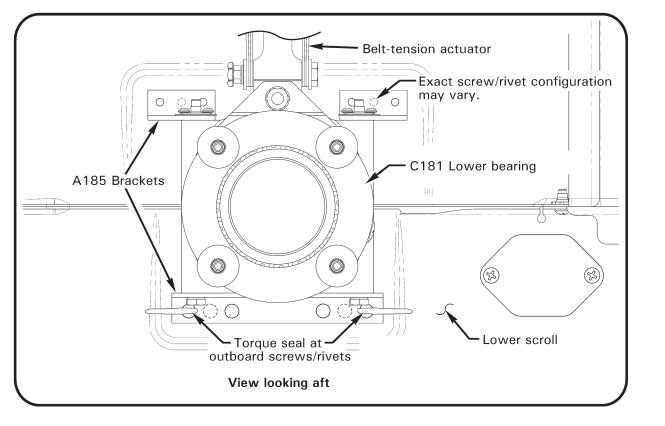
ACTUATOR LOWER BEARING A185 BRACKETS
